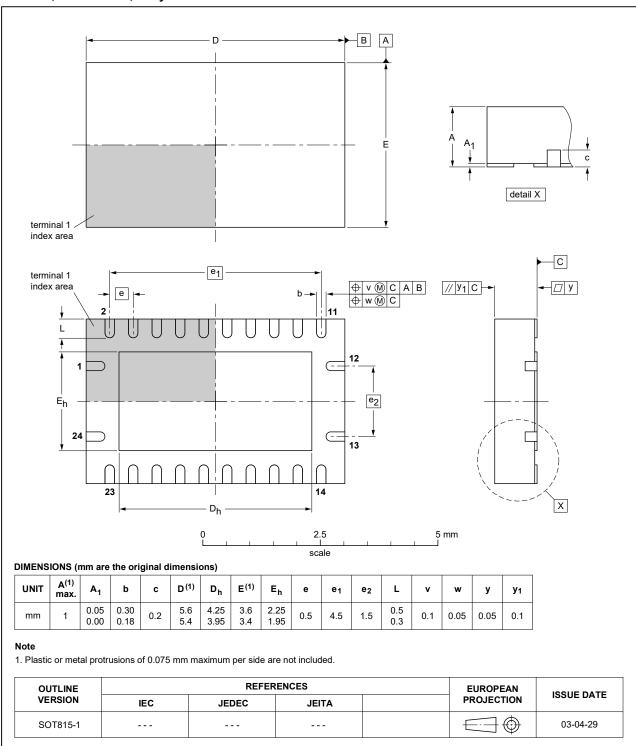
Package outline SOT815-1 (DHVQFN24)
